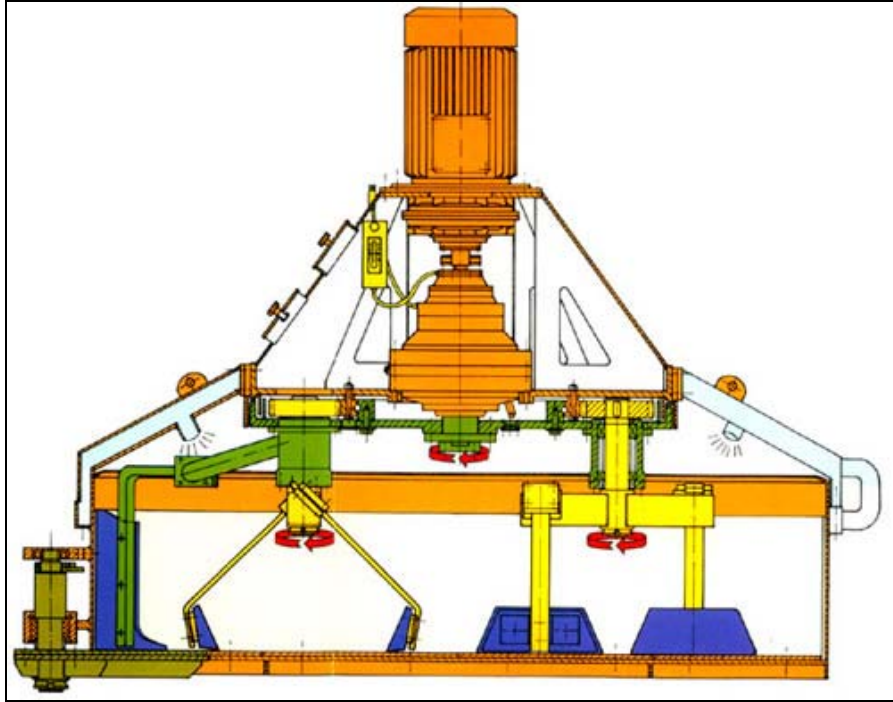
Countercurrent concrete mixer schematic (Advanced Concrete Technologies 2007)
